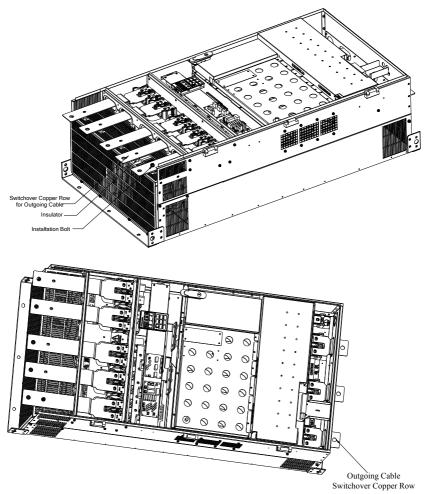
Installation of Copper Row for Incoming and Outgoing Cable Switchover
